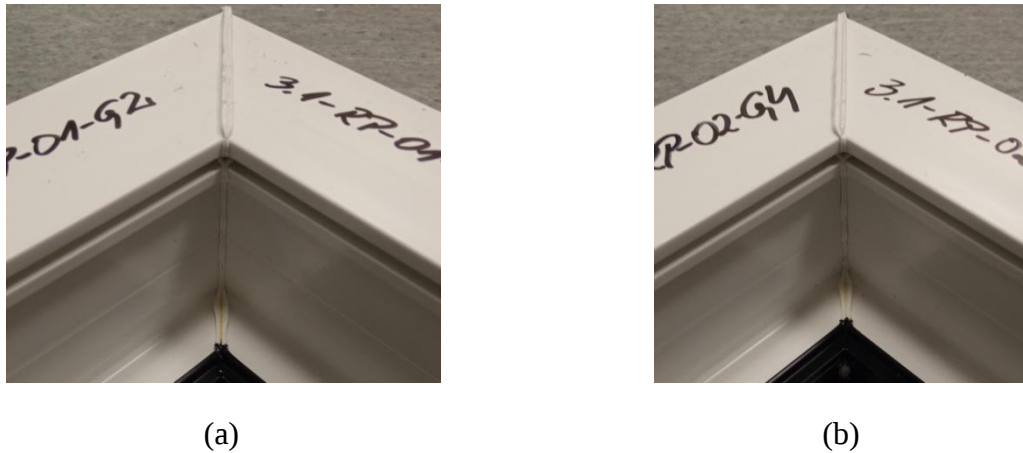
Representative welds from the test specimens: (a) welded using head 2, (b) welded using head 4 [12]
